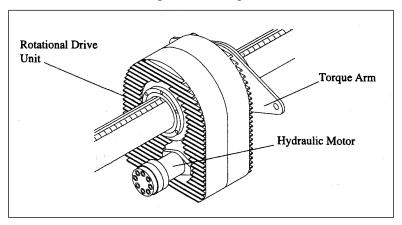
Mounting the hydraulic motor and torque arms on the RDU
